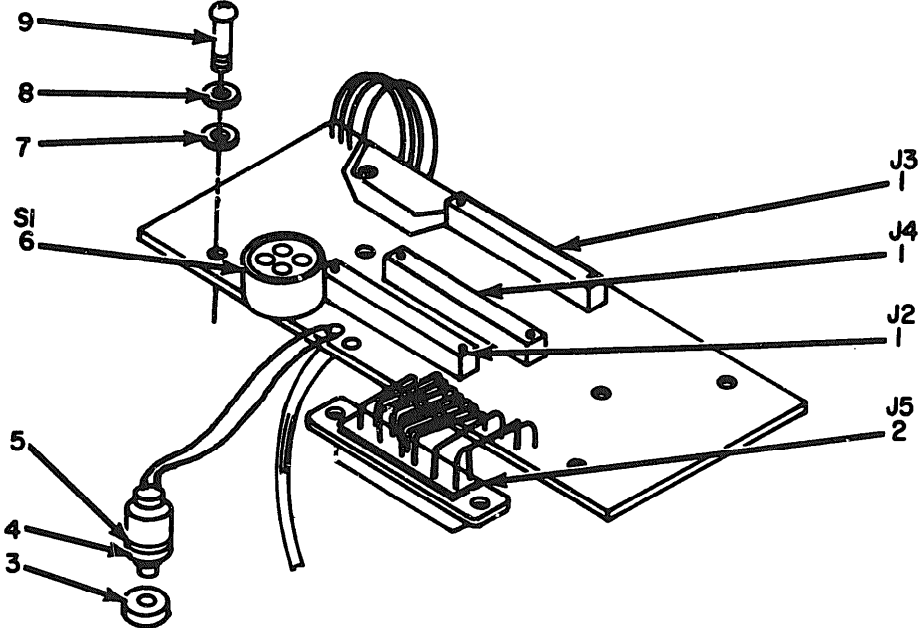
Antenna Coupler A5 (Coil Assembly) (Sheet 2 of 2).
